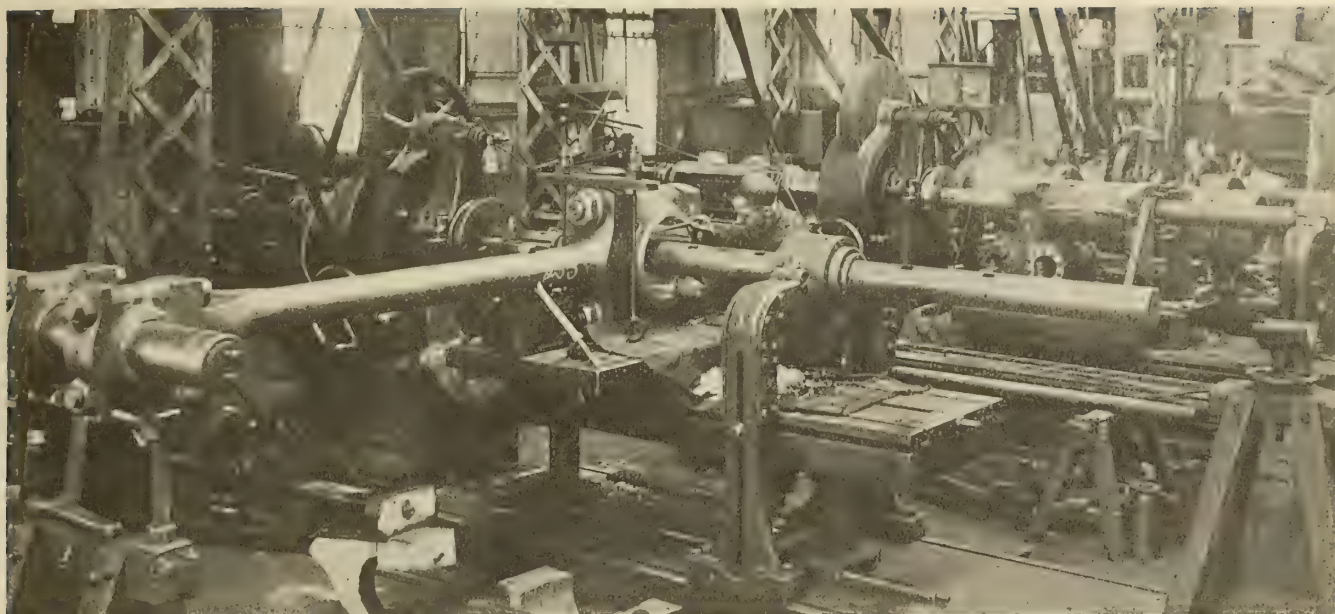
Connecting Rod Set Up on a Horizontal Boring Mill Where the Upper and Lower Bearings Are Bored in Perfect Alinement
